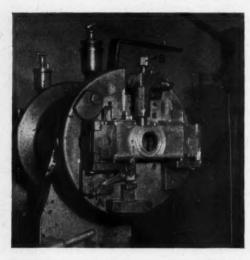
Close-up view of the face-plate fixture on the machine in Fig. 1, showing details of the locations and clamping mechanisms
